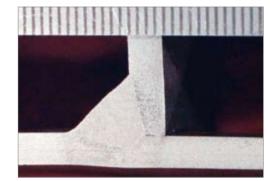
Weld penetration profile fillet weld. a=2 mm; t=2 mm; Vs=150cm/min. Shielding gas: 92% Ar/8% CO_a.
